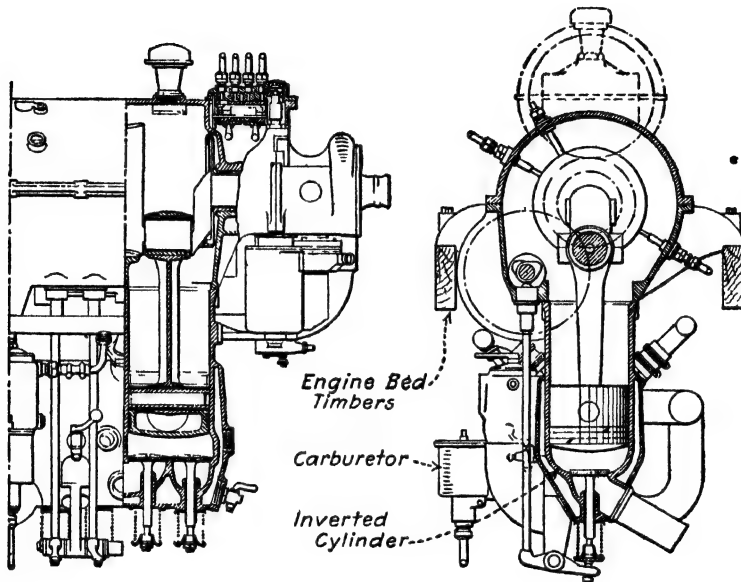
Unconventional Mounting of Early German Inverted Cylinder Motor, a Pioneer Form.
